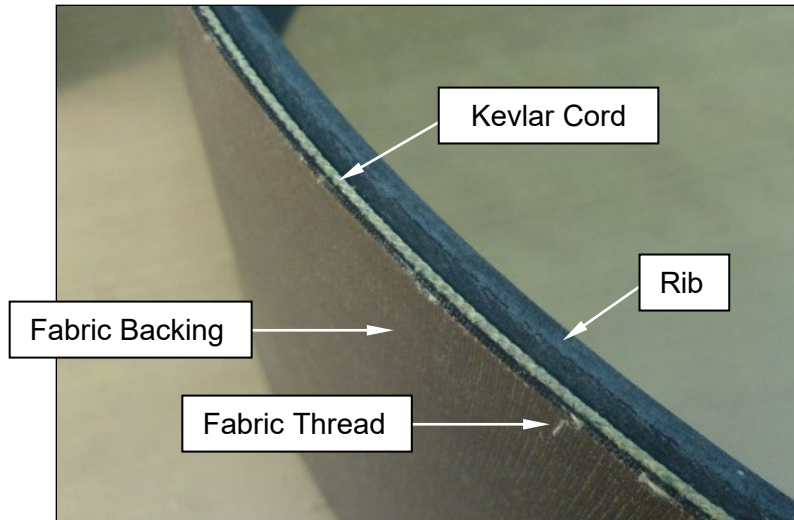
Drive Belt Visual Inspection – Exposed Cord
